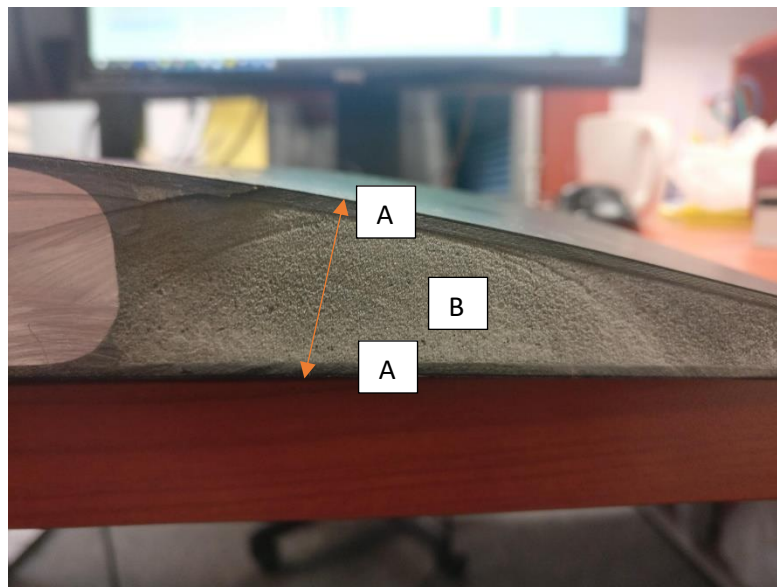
Inspection cross-sectional view, blade trailing edge. A- fiberglass shell; B – polyurethane foam.
